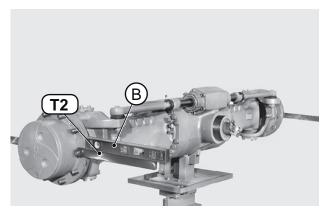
Apply tools T2 (See drawing T2 p. 45) onto the wheel hubs and lock tools.
